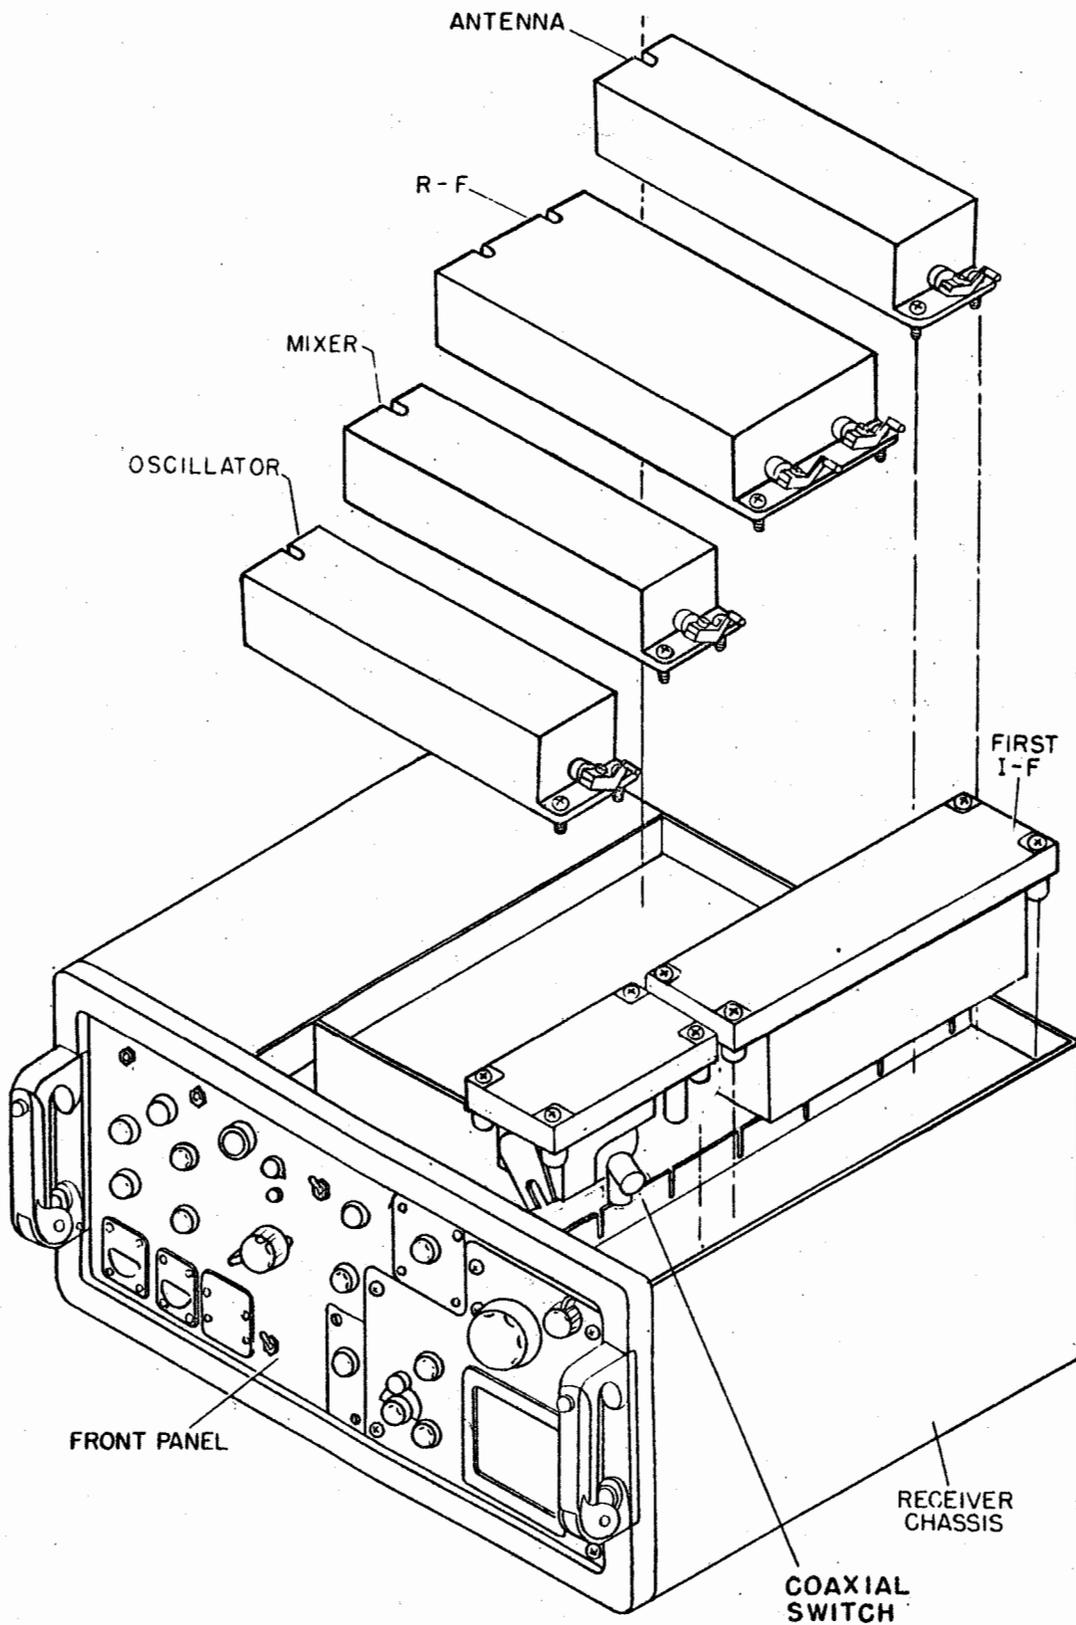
Removal and Replacement of Assemblies on Bottom Side of Receiver Chassis
